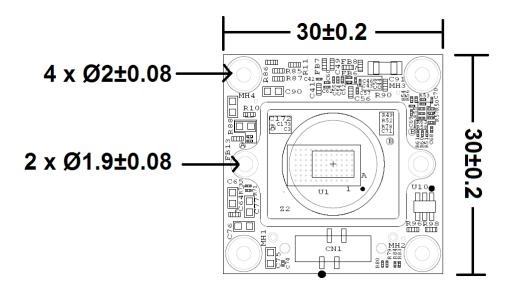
Top View of e-CAM217_CUMI0234_MOD Mechanical Drawing
